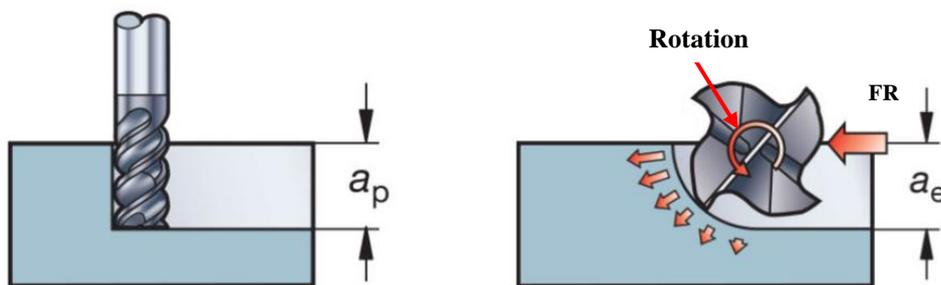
Illustration of milling (detail of cutting depth and cutting width).
